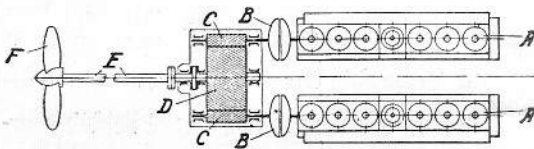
Arrangement of Diesel engines and Vulcan gear. A—Diesel engines, B—Vulcan clutches, C—Gear pinions, D—Gear wheels, E—Propeller shaft, F—Propeller.
